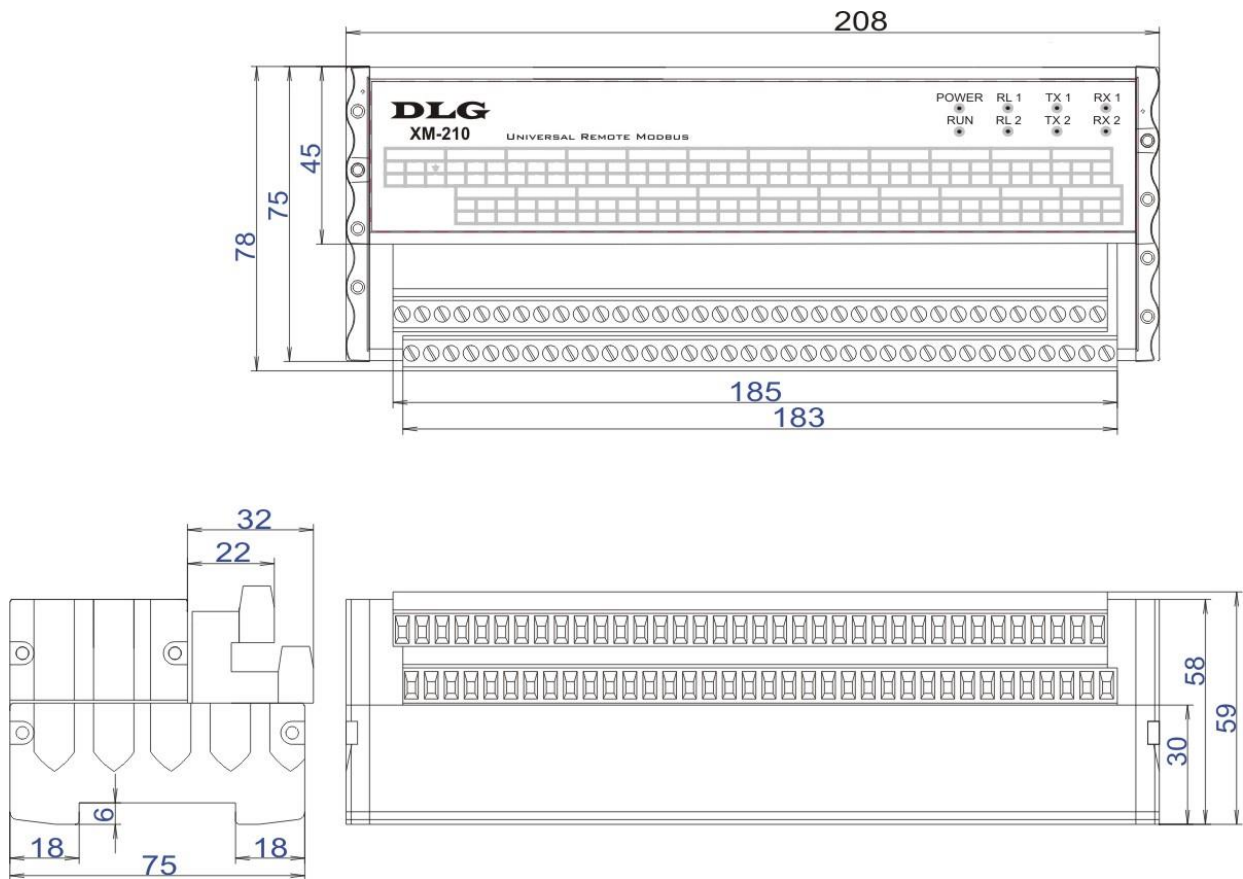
Dimensioning for assembling (dimension in milimeters)
